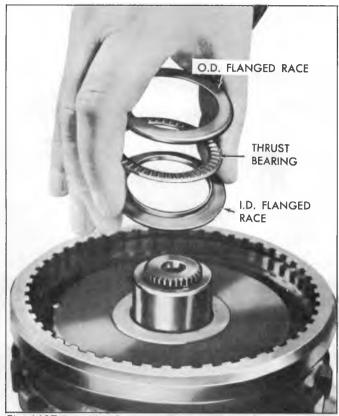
T-Installing Rear Internal Gear to Output Shaft Bearing and Races
